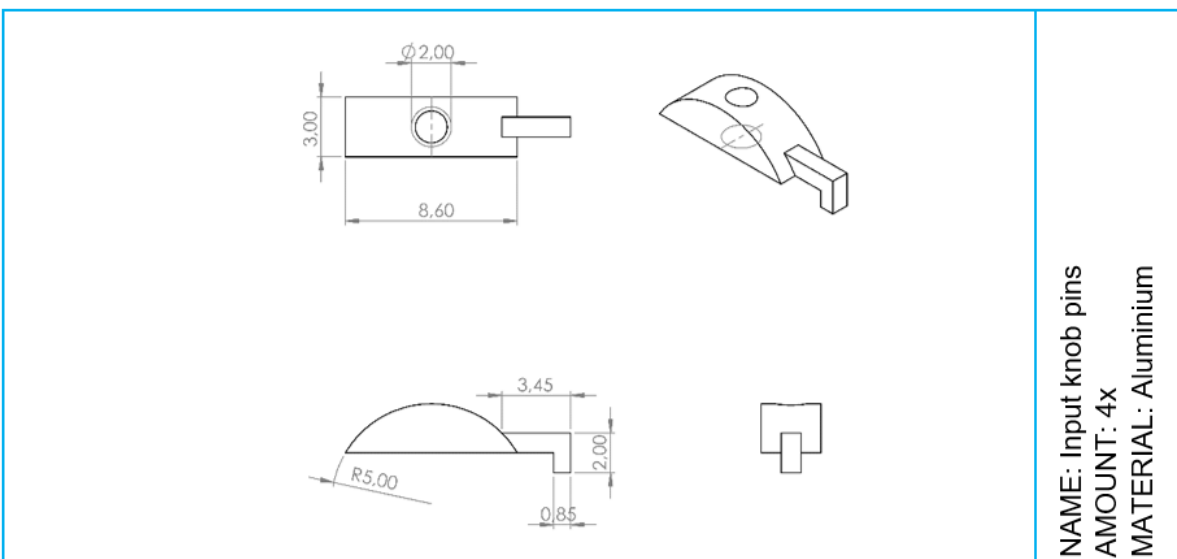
Construction drawings of the input knob pins - Machined prototype
